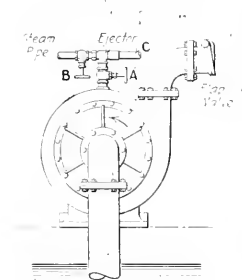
STEAM EJECTOR FOR PRIMING PUMP
